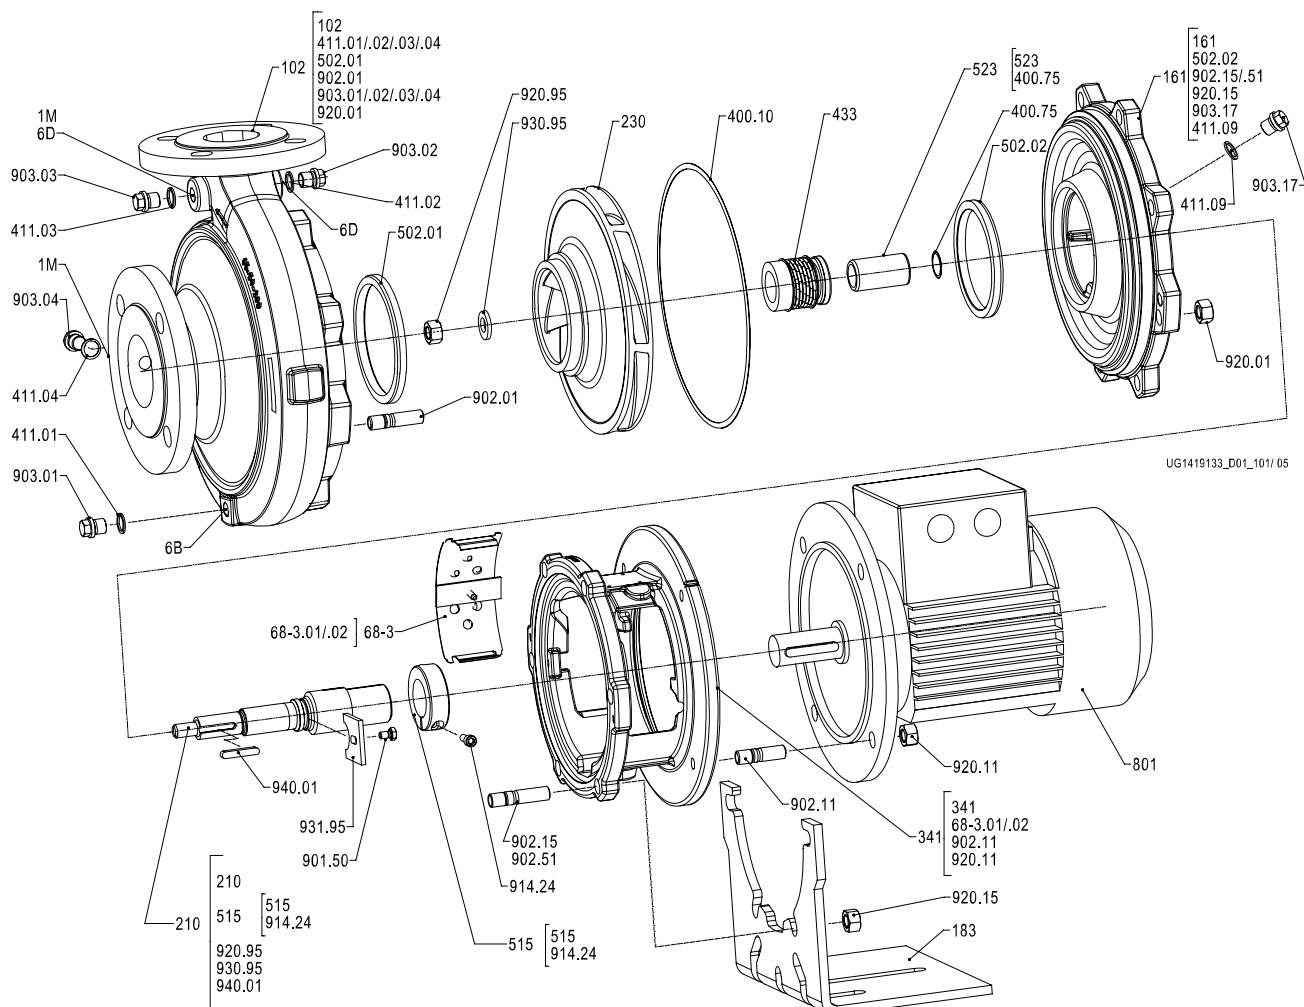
Version with single mechanical seal and bolted casing cover, without pump foot
